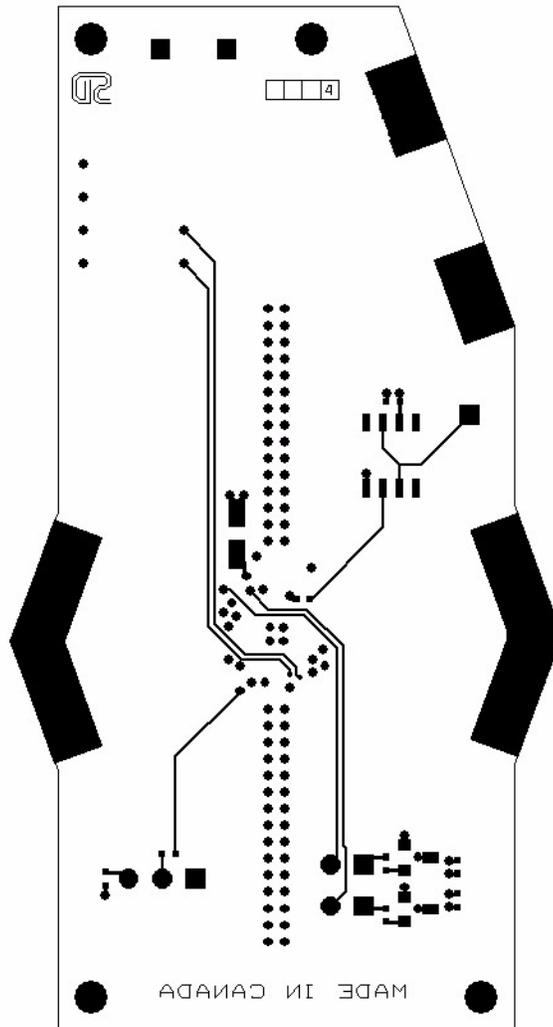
XBN2003 PCB Layout — Bottom Components
